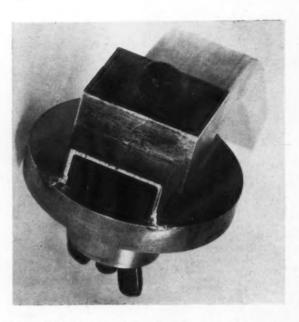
Tack welding of a rotary joint body to a tube with brazing shims in place
